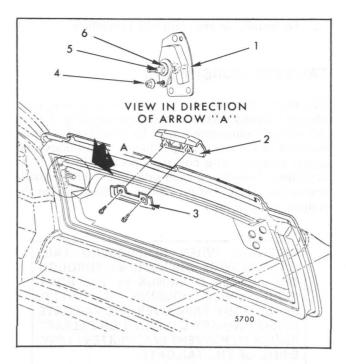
Tailgate Lock Striker and Grip Handle Assemblies
